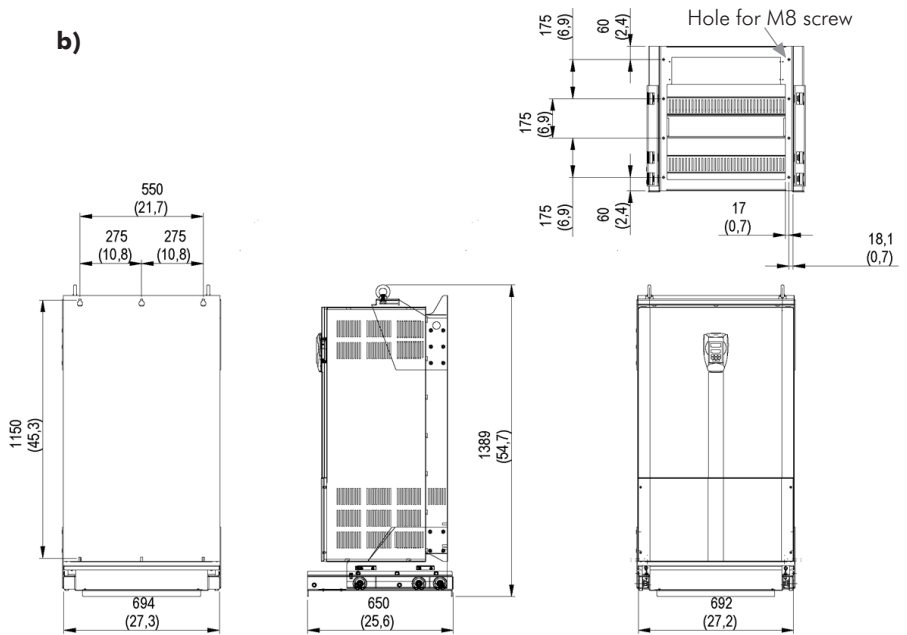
b): Dimensions of the KME Kit - Size 10 and 10E - mm (inches) (800 mm wide cabinet)
